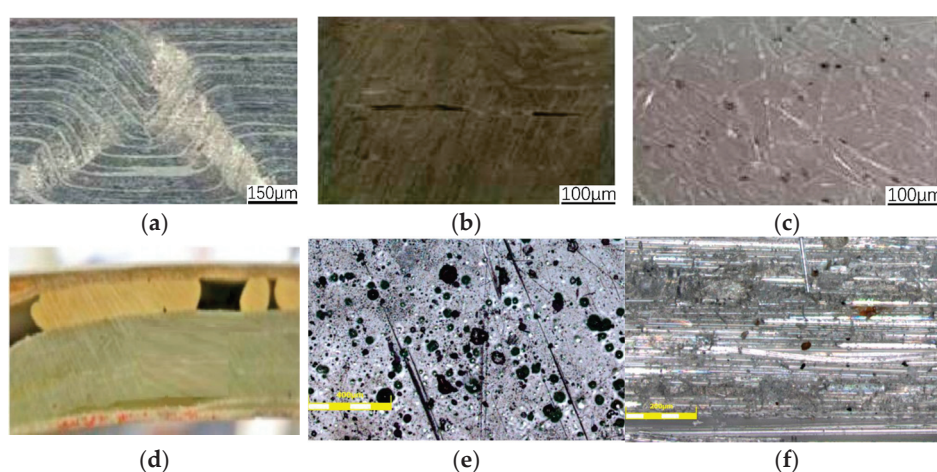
Typical manufacturing process defects of wind turbine blade main spar structure: (a) wrinkle defects; (b) delamination defects; (c) air bubble defects; (d) lack glue defects; (e) pore defects; (f) inclusion defects [16].
